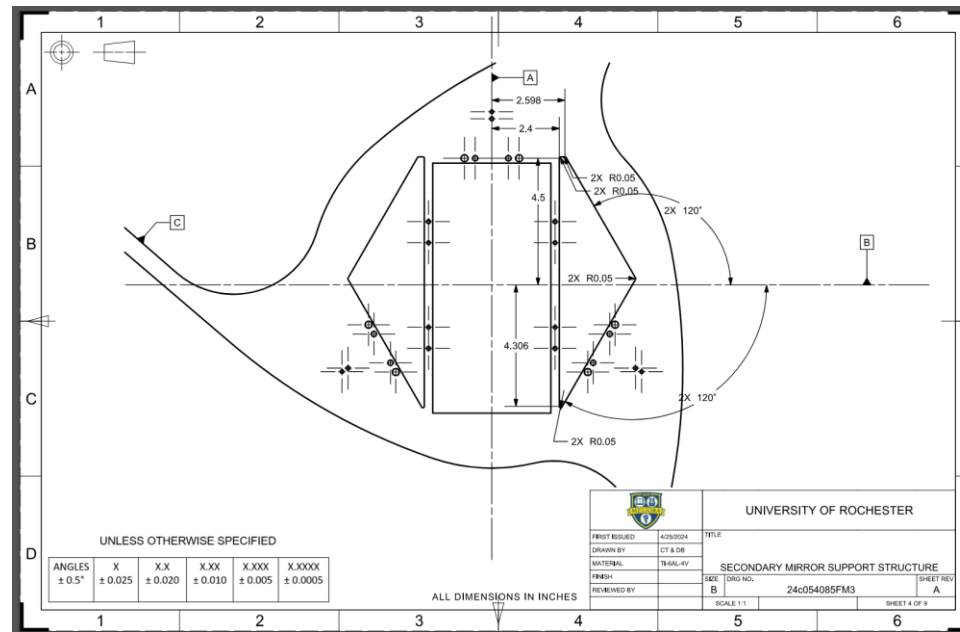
Top View Drawing with Triangular Cutout Dimensions.
